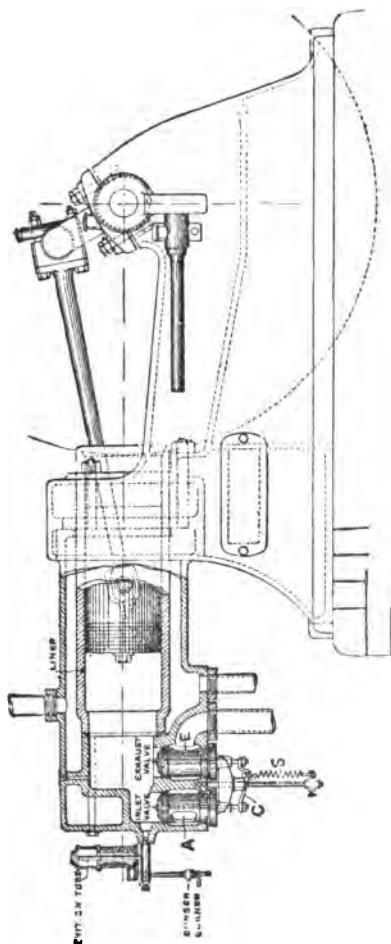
LONGITUDINAL SECTION OF "FORWARD" OTTO GAS ENGINE.
